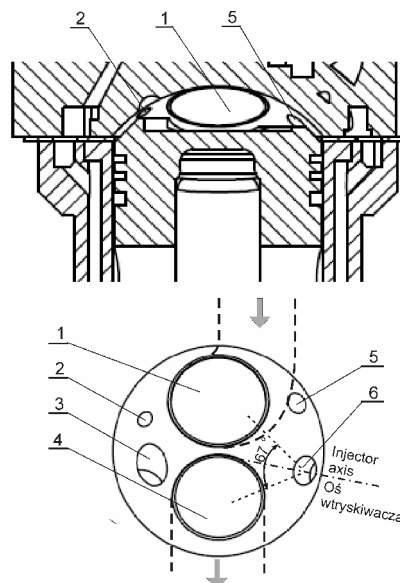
Cross-section and schematic view of SB 3.5 engine combustion chamber: 1 – intake valve, 2 – in-cylinder pressure sensor, 3 – spark plug seat, 4 – exhaust valve, 5 – supplementary sensor seat, 6 – injector seat
